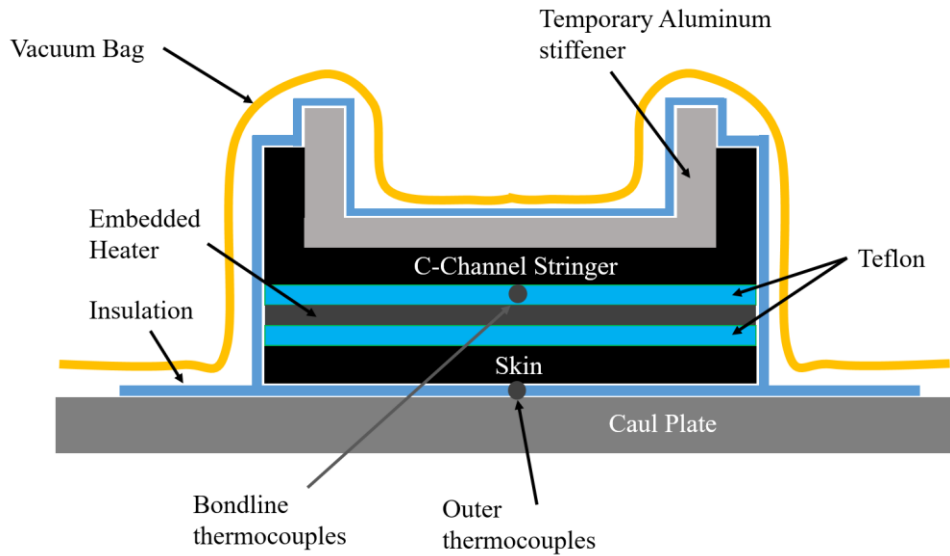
End view of the bagged sample for an example C-channel specimen.
